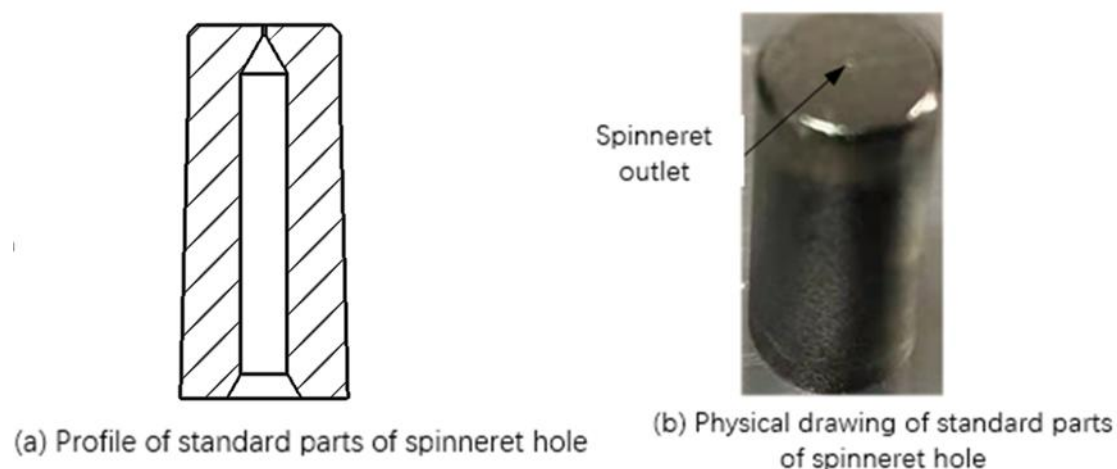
Design standard parts of spinneret hole and actual processing drawing
